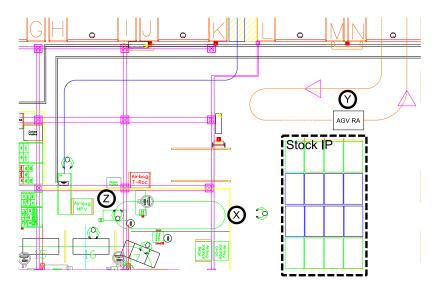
Current Layout of the IP Stock and POF to the assembly line.
